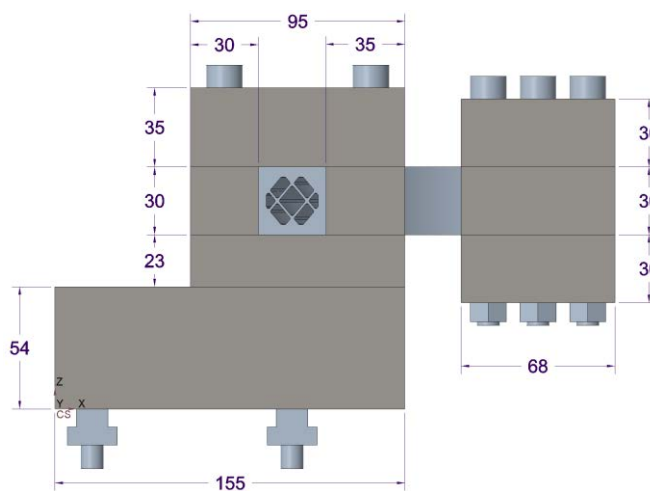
Front view of the clamping system with the main dimensions indicated (mm).
